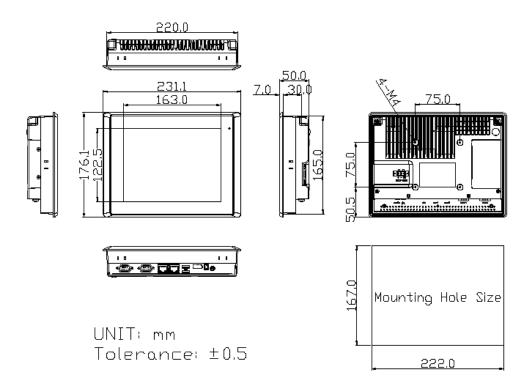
Dimensions of TP-3445-08AP/AR/AG(H)
